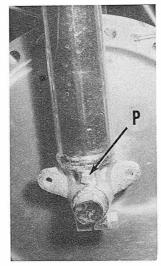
Front suspension units are drained by removing plug (P), then compressing and releasing forks.
